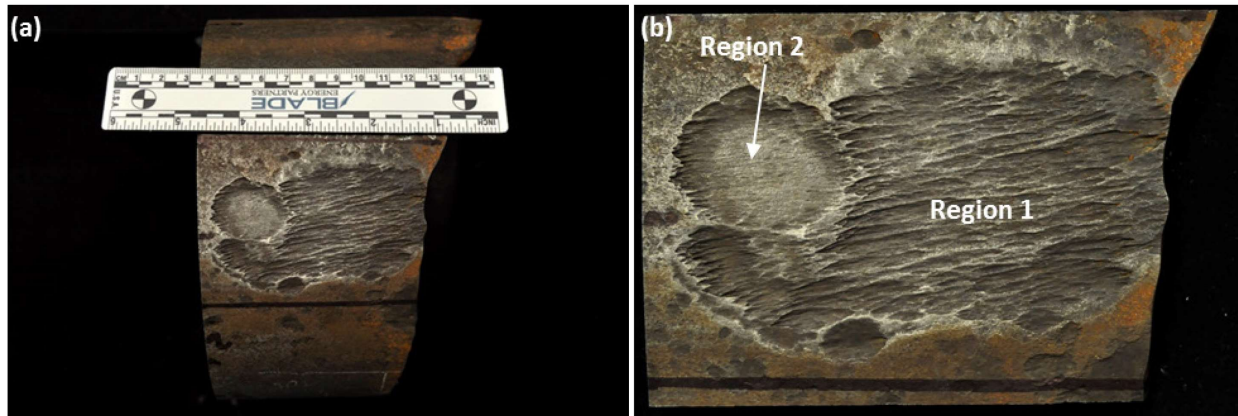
(a) C022B1 Specimen Extracted from the 7 in. Casing Adjacent to the Circumferential Fracture; (b) Macroscopic View of C022B1 Specimen After Cutting
